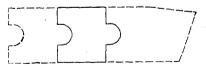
Improved stamping operation with two pieces formed at each stroke of machine and no waste material.
